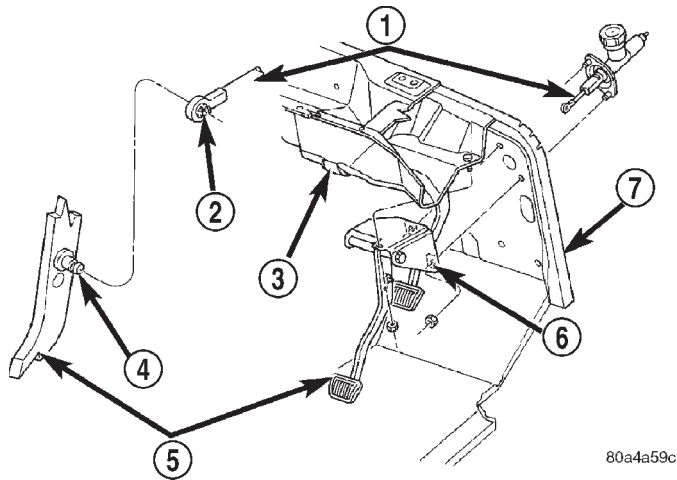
Clutch Pedal Mounting—Right Hand Drive
